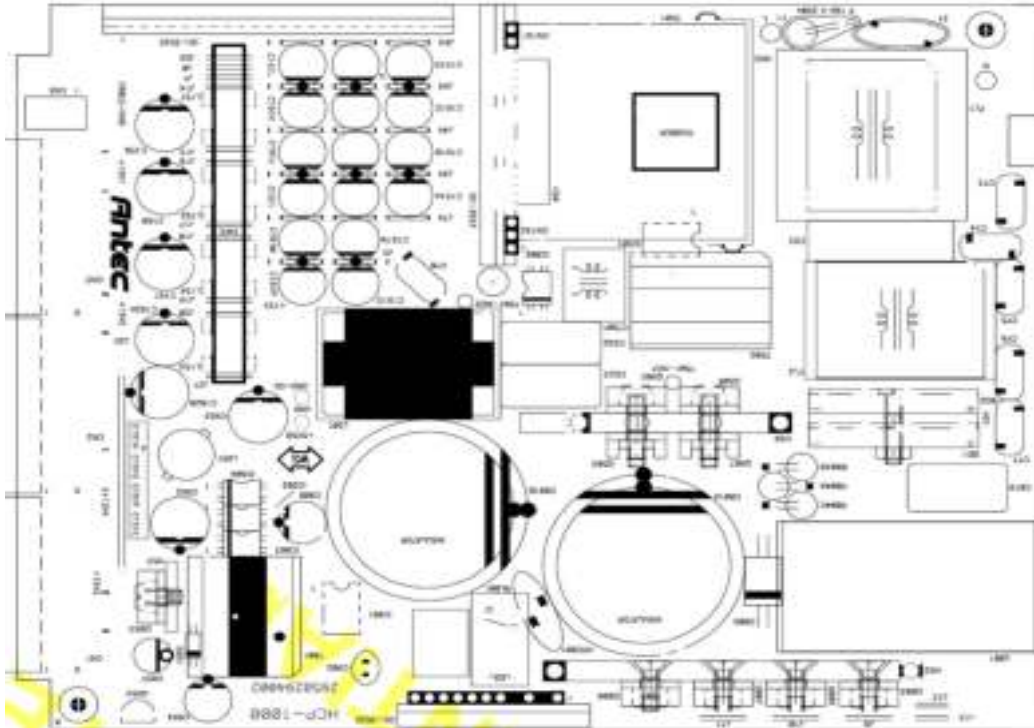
PCB type DC-4914 (GPS-1000DB XX)
